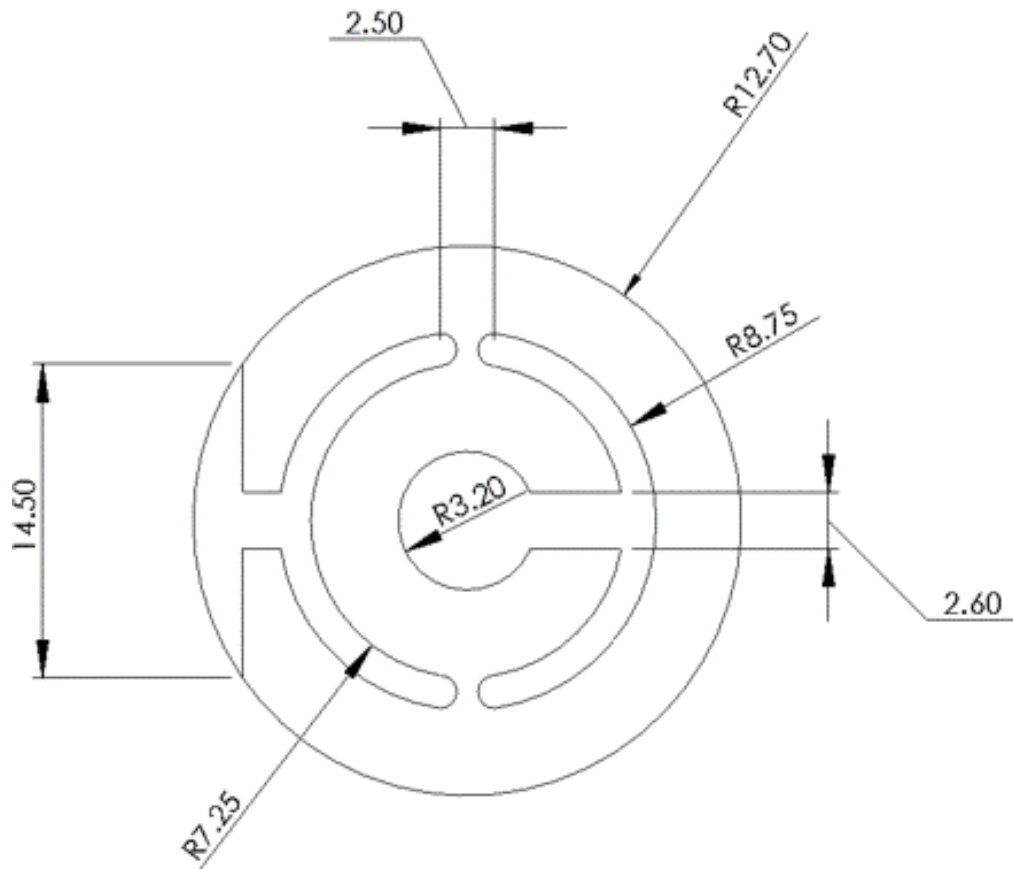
Schematic bottom-view of the proposed QCM design with detailed dimensions in mm.
